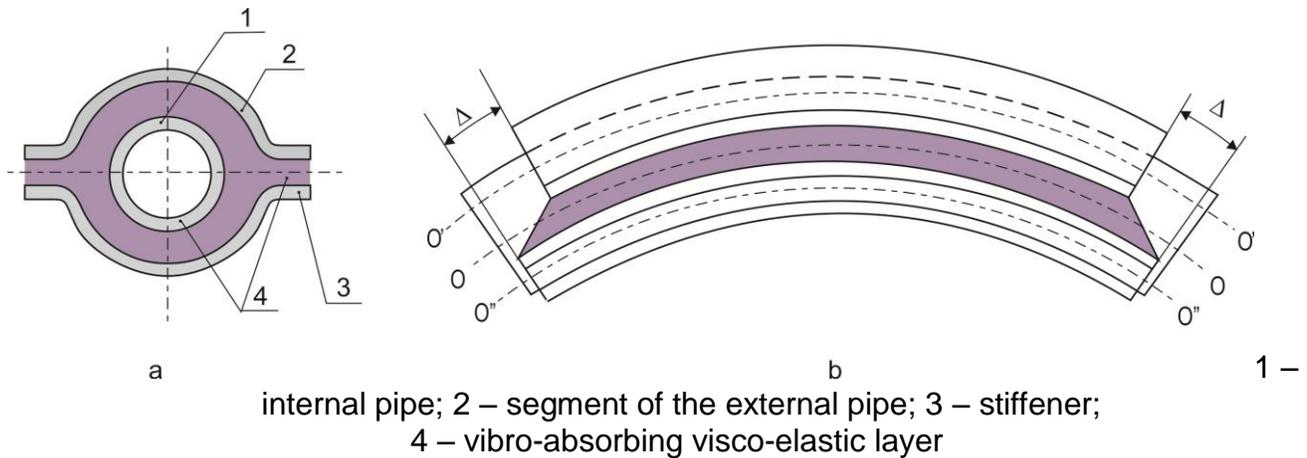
Vibro-absorbing pipeline (a) and its first beam-type bending mode (b)
